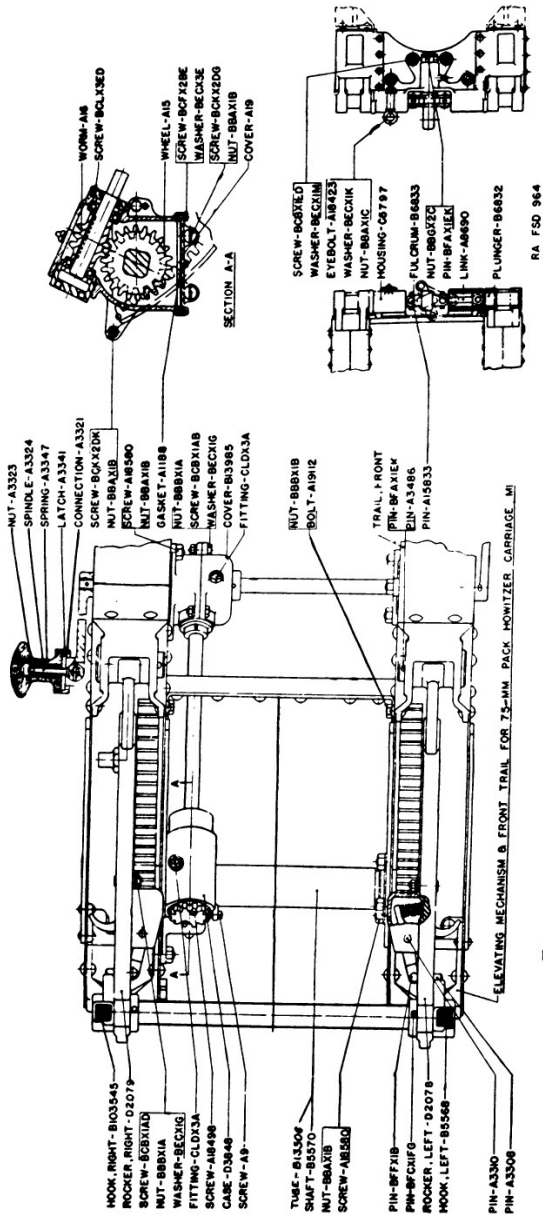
75-mm pack howitzer carriage—elevating mechanism and front trail.
